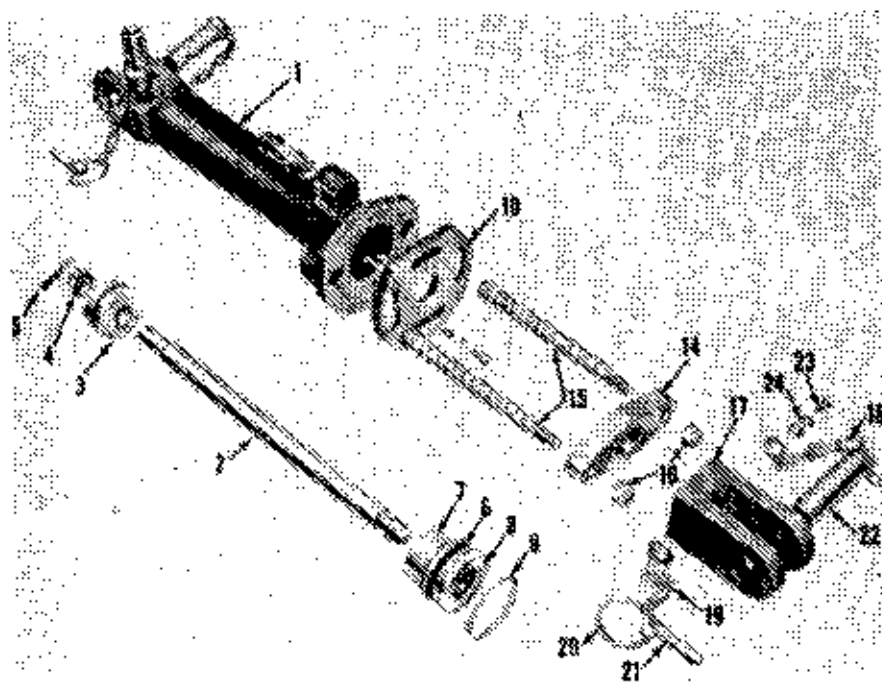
Exploded view of double-acting remote cylinder. Cylinder has 2 1/4-inch bore and 8-inch stroke, and develops 7500 pounds thrust at 2000 psi. Cylinder may be converted to single-acting operation. See paragraph 138.
